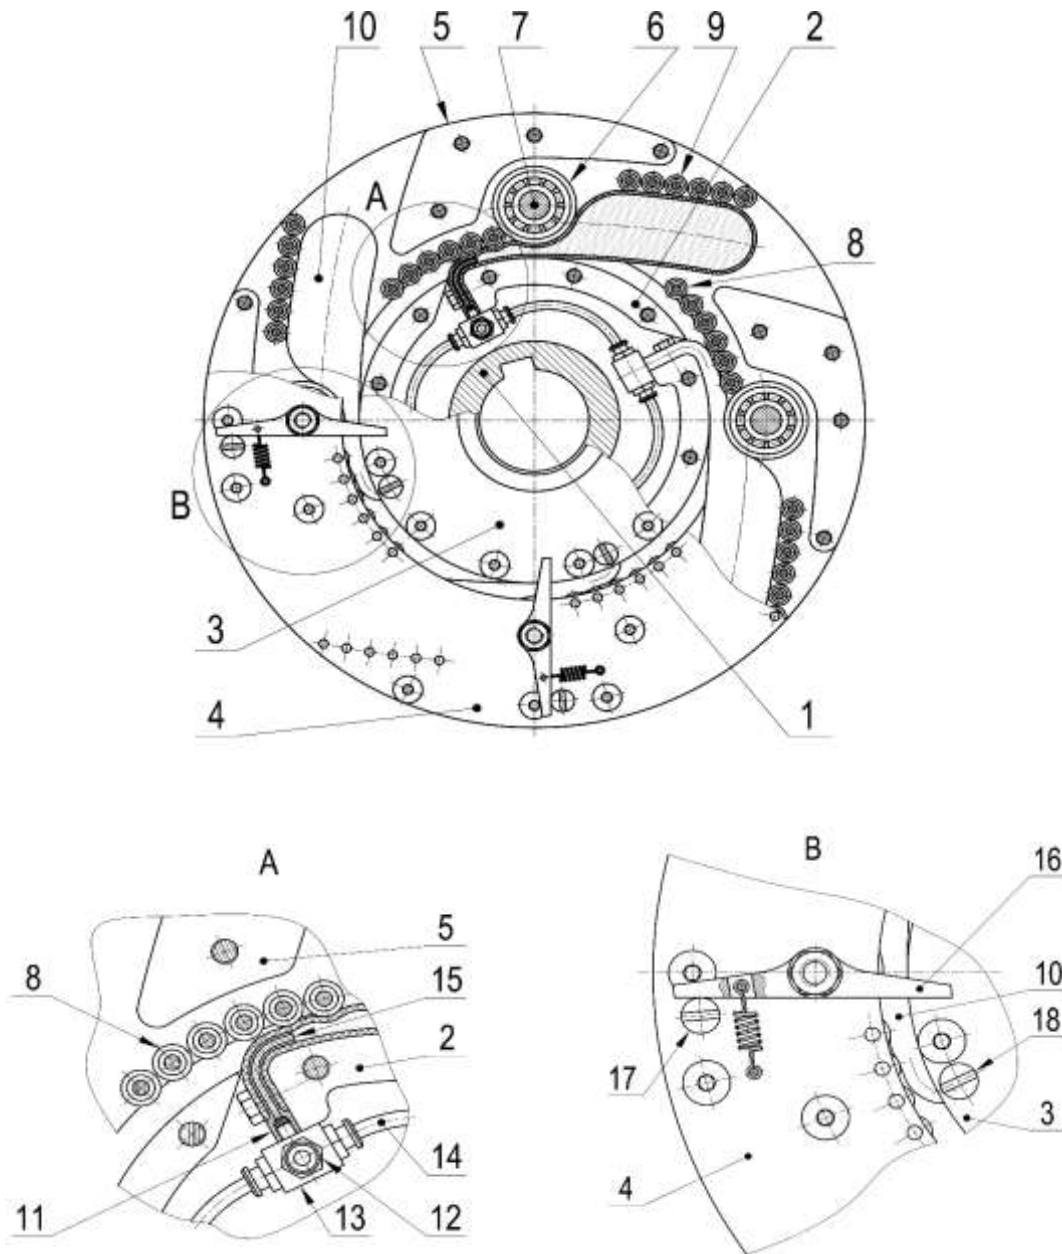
Drum pneumatic flexible shaft coupling in a partially loaded state – main view with details
